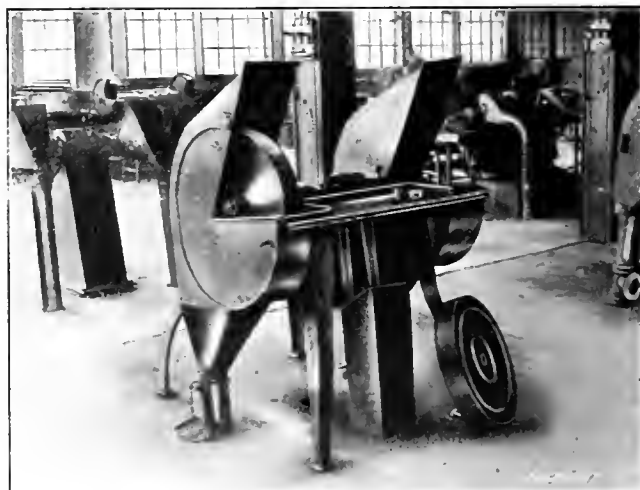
An Old Grinder built in 1877 which still gives Efficient Service. Note also System used for Exhausting the Dust due to Grinding.
